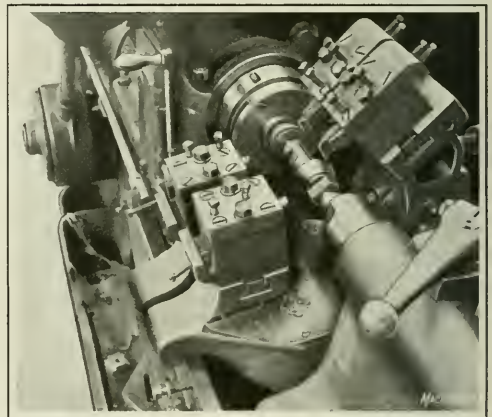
Close-up View of Machine provided with the Tooling for a Small Bevel Pinion
